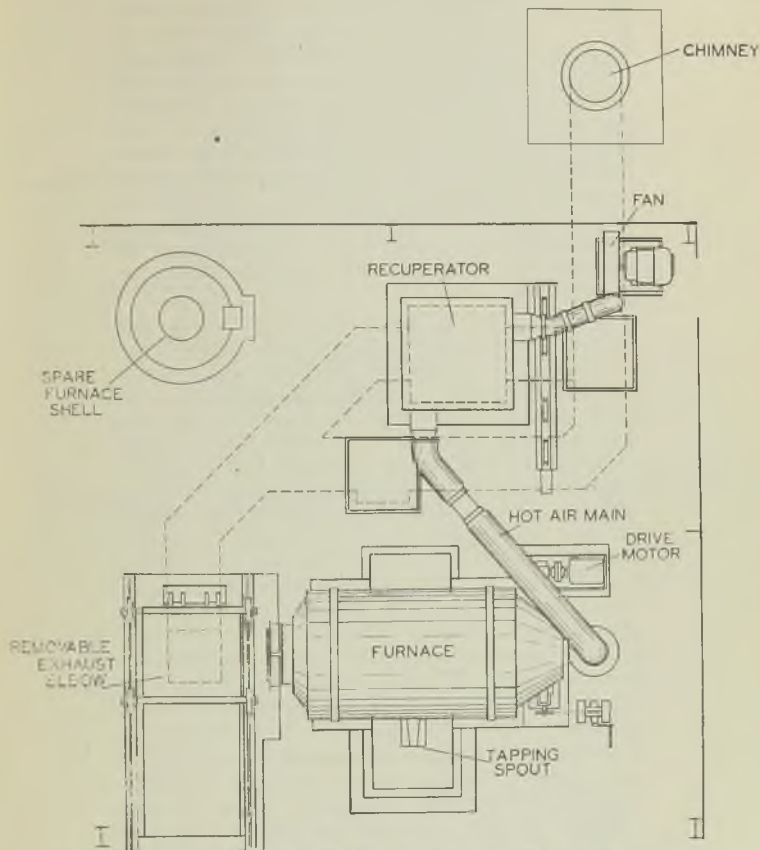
PLAN OF STEIN OIL-FIRED ROTARY-FURNACE INSTALLATION.
